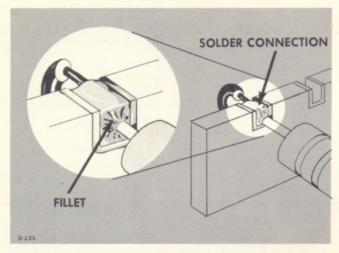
Note the slight fillet formed on a correctly soldered joint.
